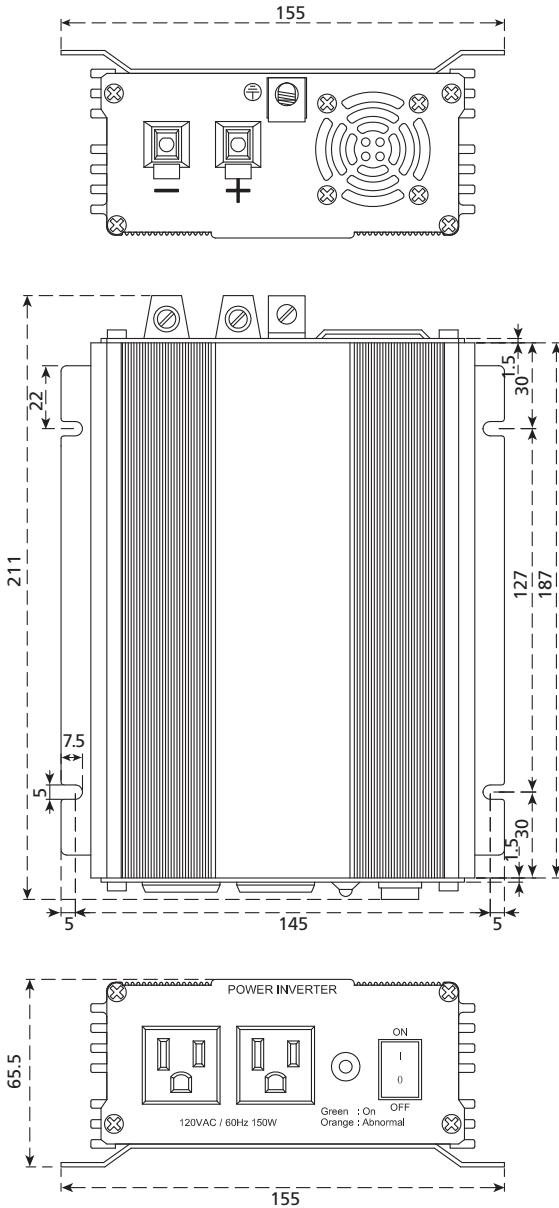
PST-150-12 & PST-150-24; Overall Dimensions & Mounting Slots
